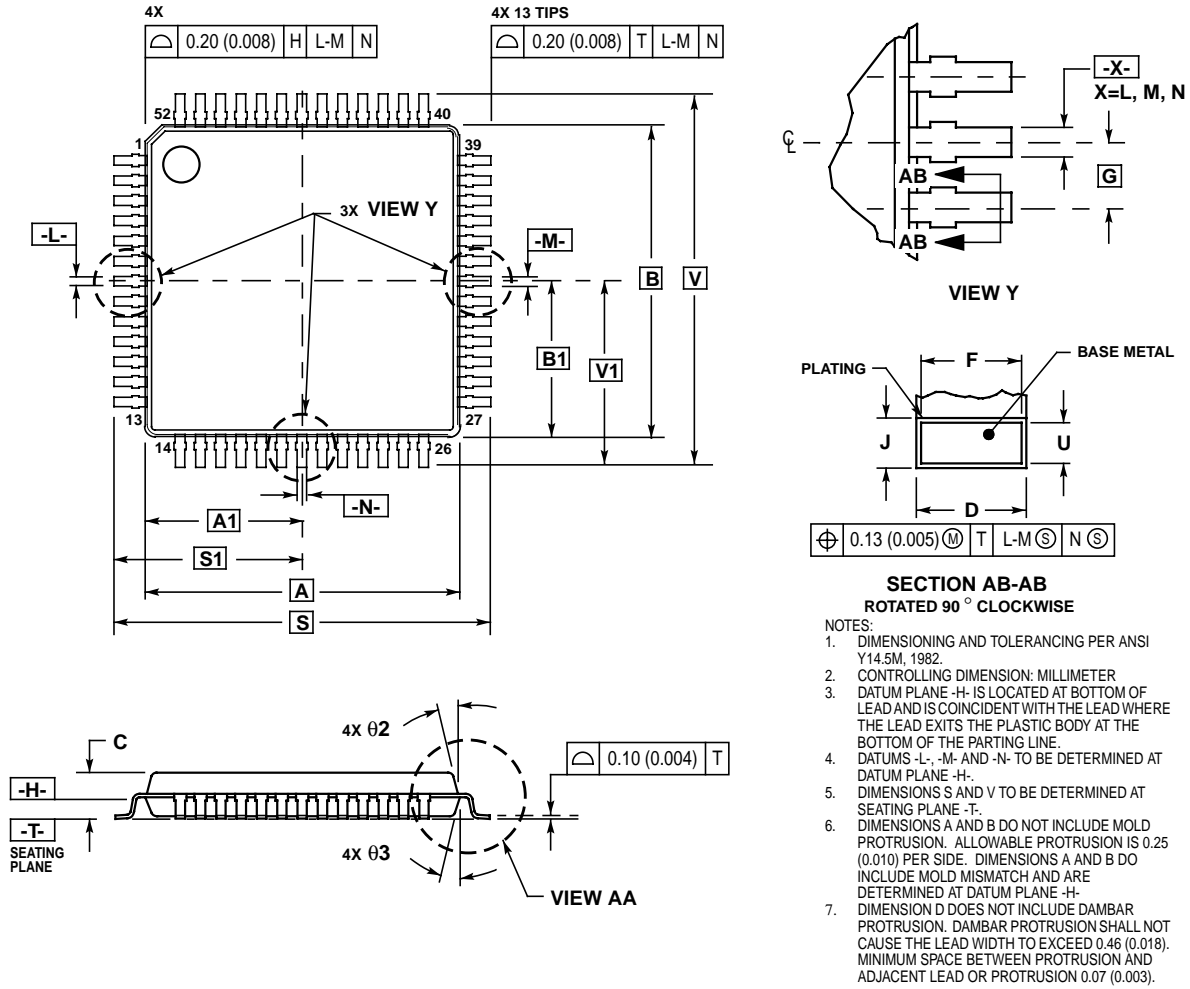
52-pin LQFP Mechanical Dimensions (case no. 848D-03)
